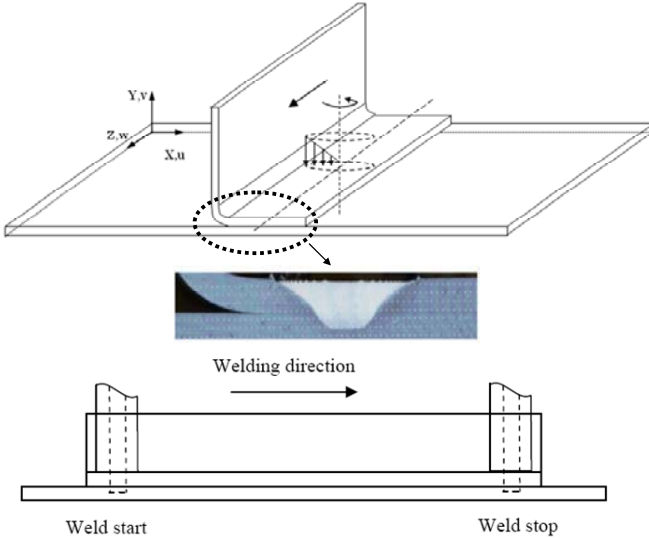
Geometry of a stringer friction stir welded to a plate. Used for coupling of residual stress and in-service load analyses, [22].
